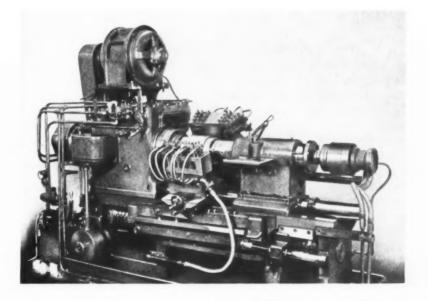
Machine Equipped for Semi-finish-turning the Outside and Facing the Head End of the Cylinder Barrel, Using Hydraulically Operated Headstock and Tailstock Fixtures
